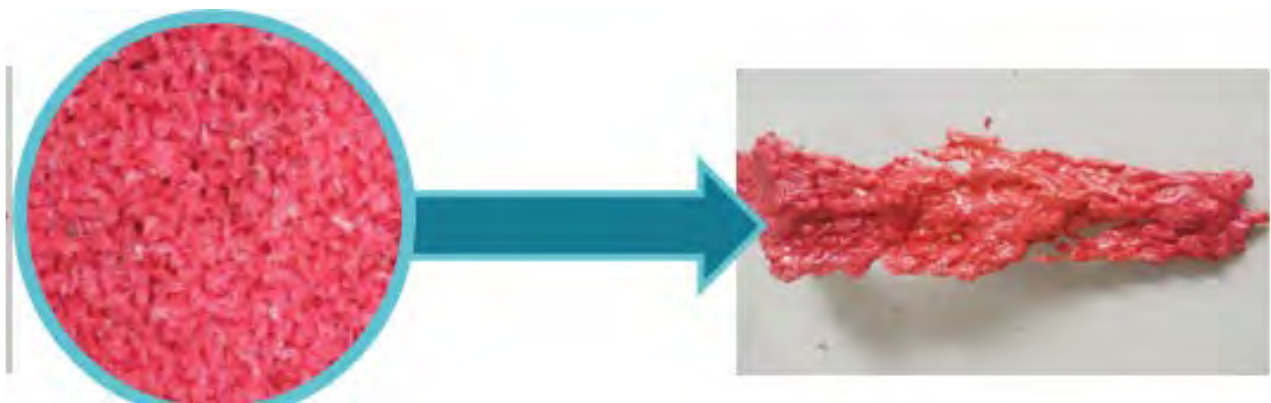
Shredded TPU material (left) and the material running out from the nozzle of the injection molding machine after cooling down (right)
